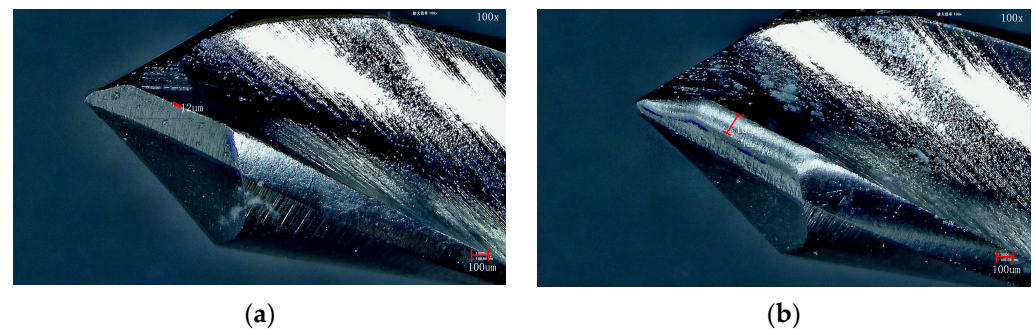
Inspection picture of rear tool face wear. (a) Unworn tool; (b) worn tool.
